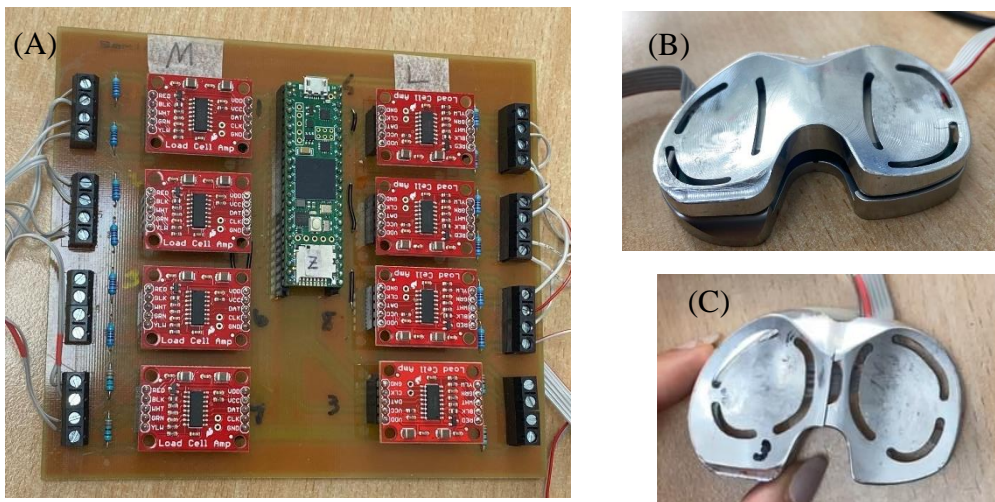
Full Prototype a) PCB b) Zimmer Specific Design Tibial Sensor c) Ring Design Tibial Sensor
